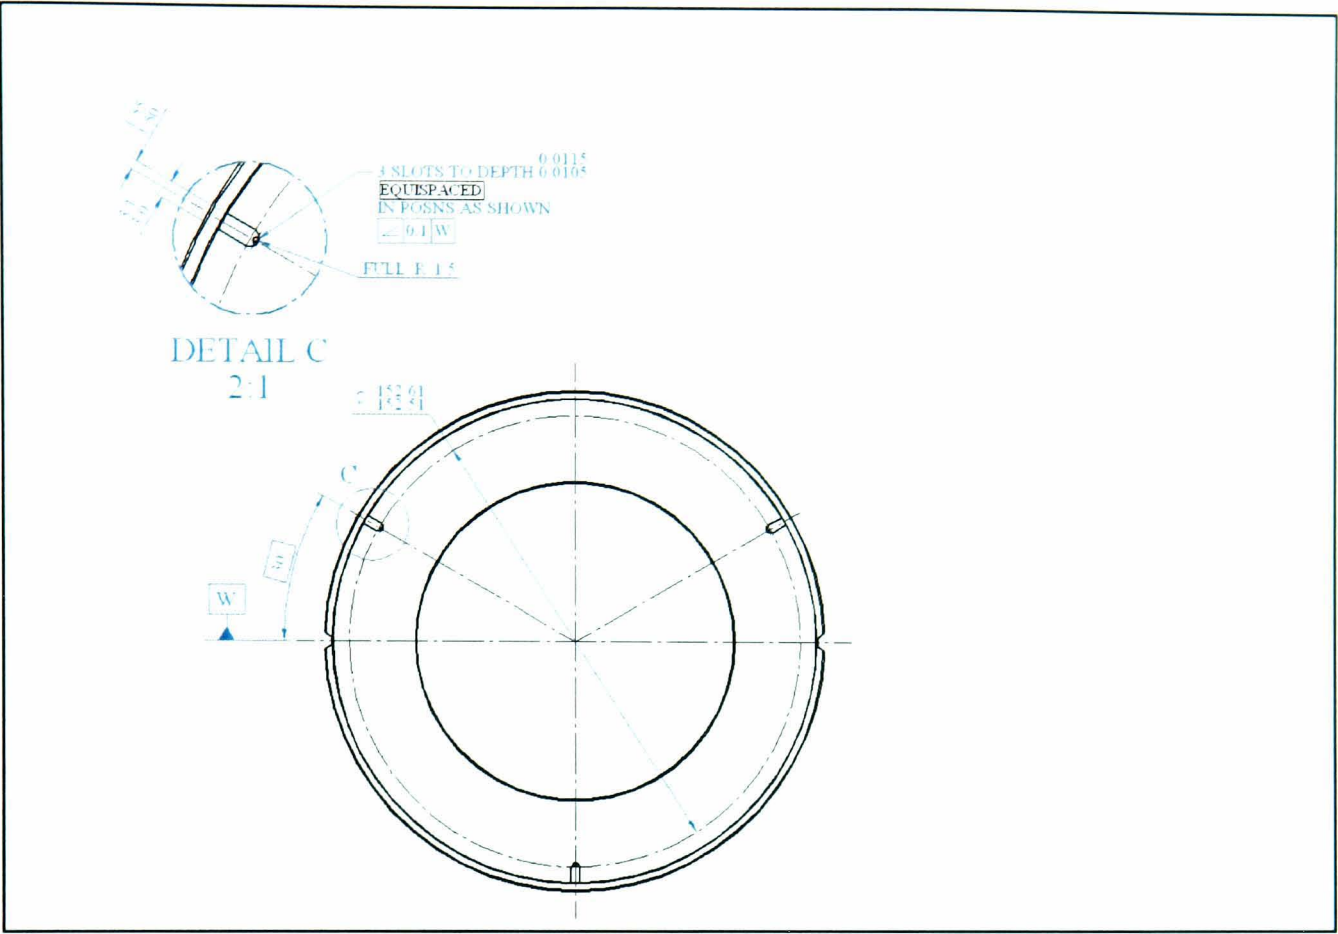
Rear view of SFLS rotating seat – engineering drawing
